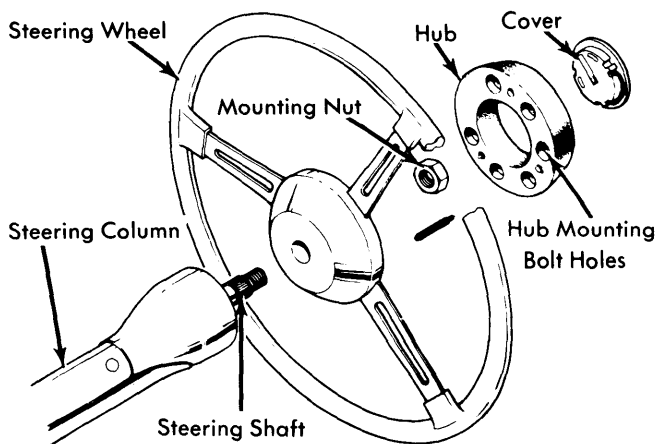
Spitfire Steering Wheel Components, Others Similar
